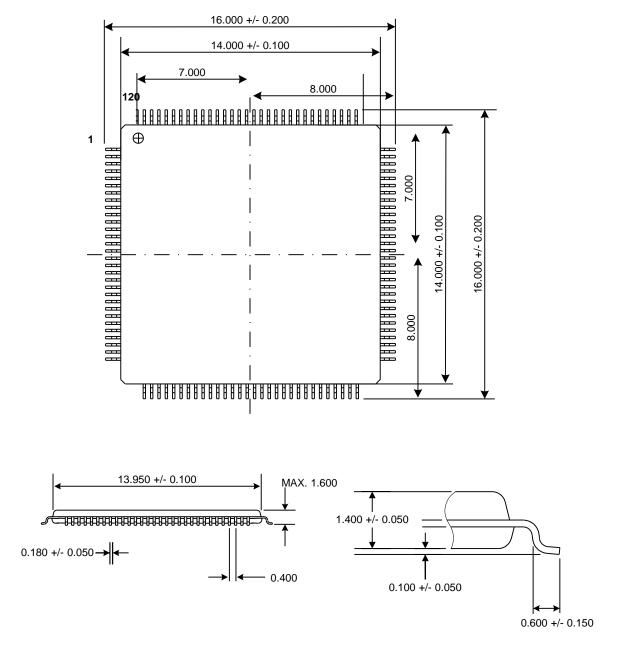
71M6534/6534H 120-pin LQFP Package Outline
